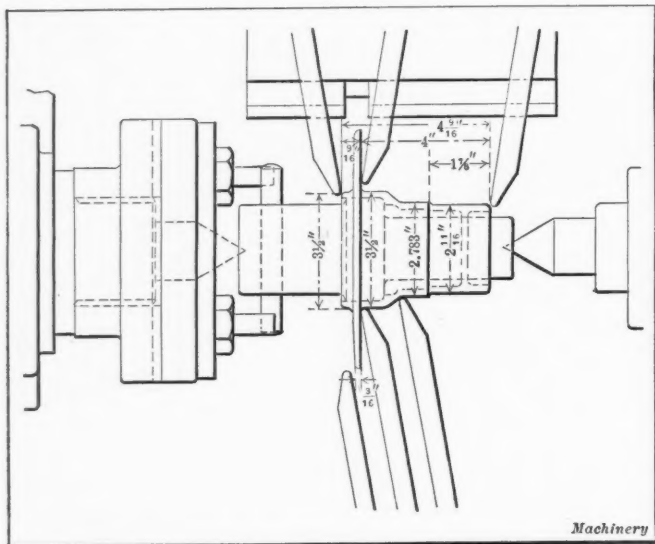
Machining a Wheel Hub on the Reed-Prentice Lathe
